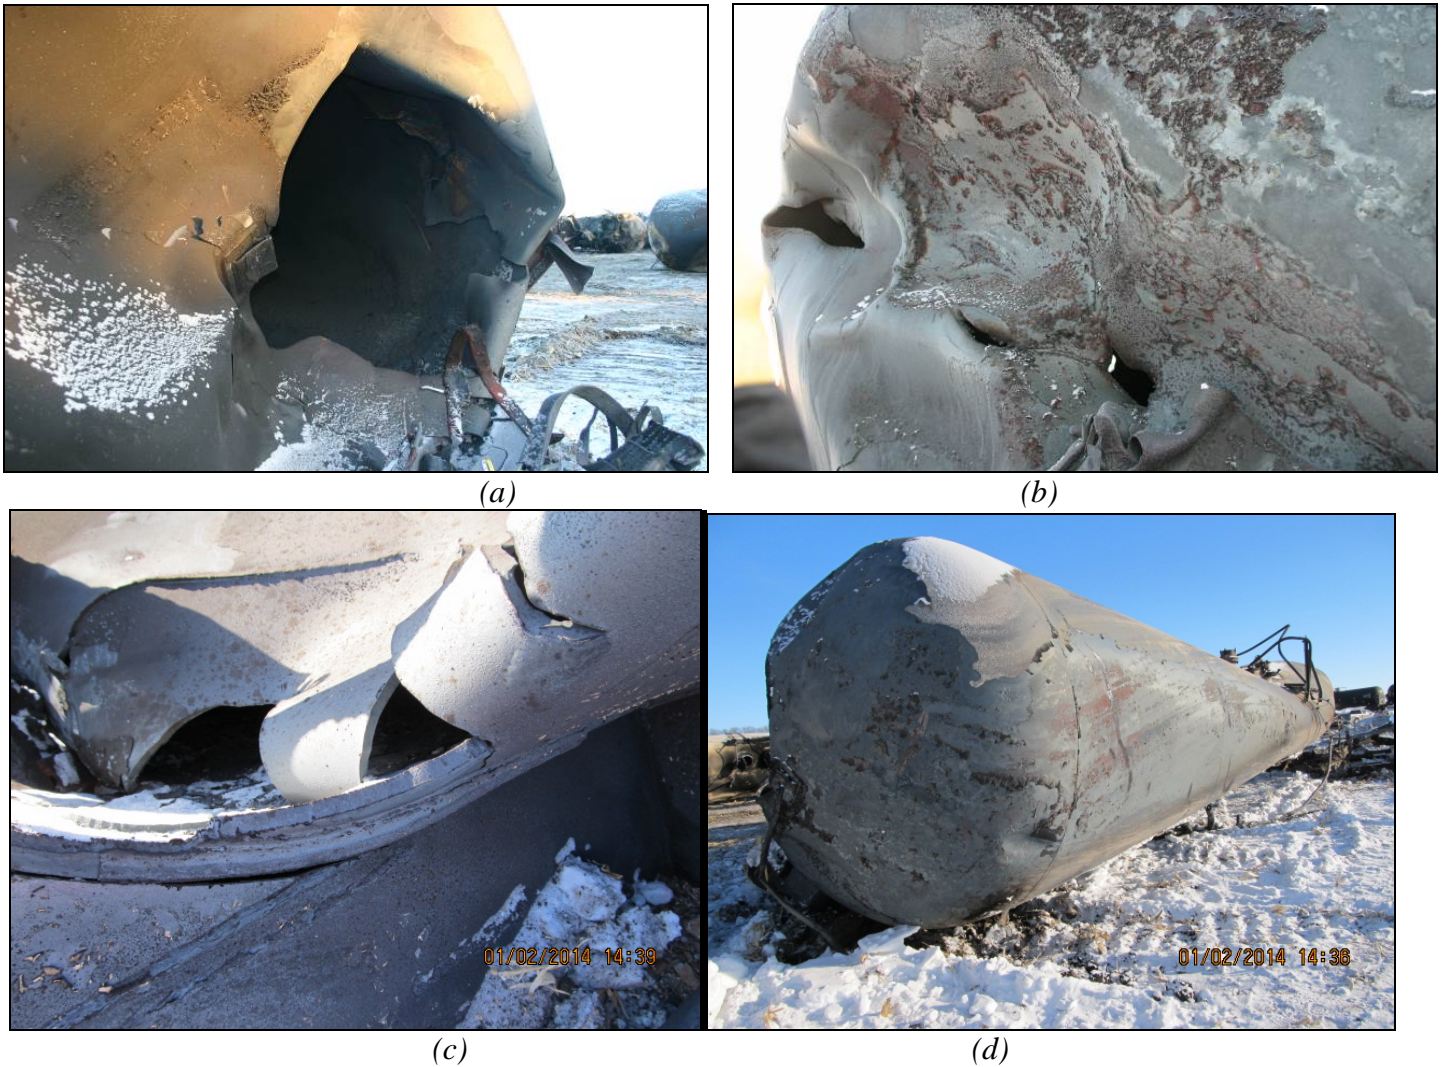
TAEX 1602 (Field Wreckage Index#19) (a) Large puncture in A-end head; (b) Three punctures in B-end head; (c) Head pad damage and separation; (d) Center of tank car crushed.
